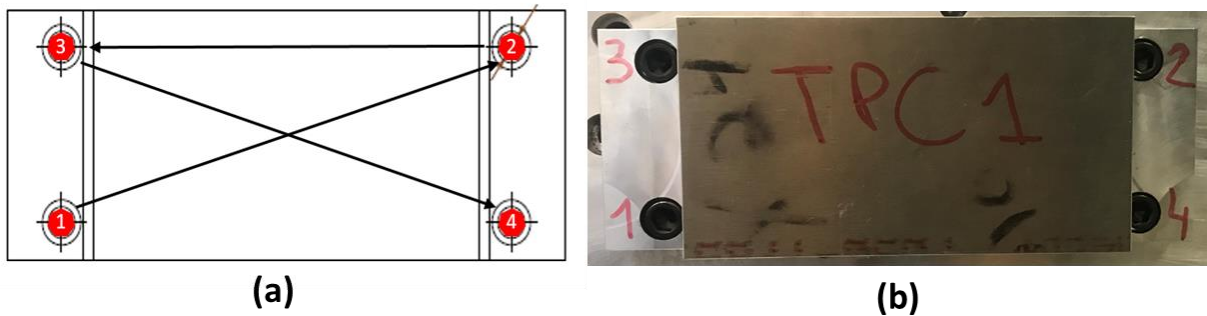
TPC1 bolting sequence diagram (a) and bolted to machine bed (b)
